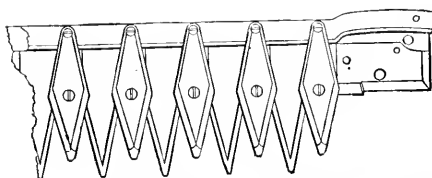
Cutting Apparatus of First Wheeler Machine, 1853.
